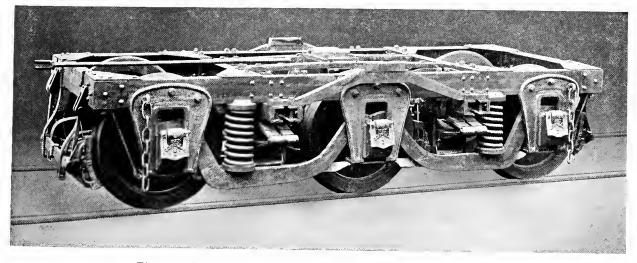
Six-Wheel Steel Truck. Wason Manufacturing Company.
